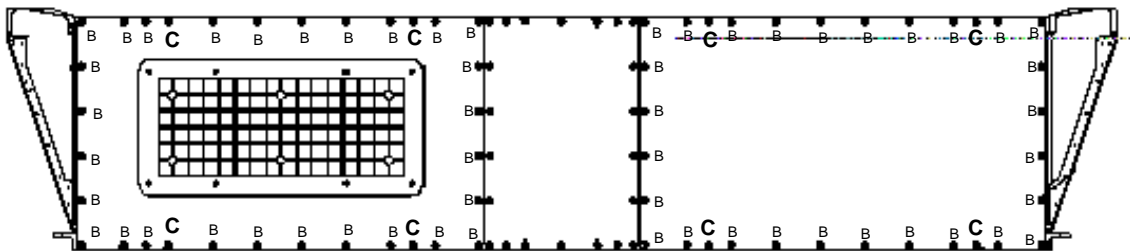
Front view of Filter Panels with bolts and fasteners. The fasteners marked C are captive. The bolts marked B are non-captive.
